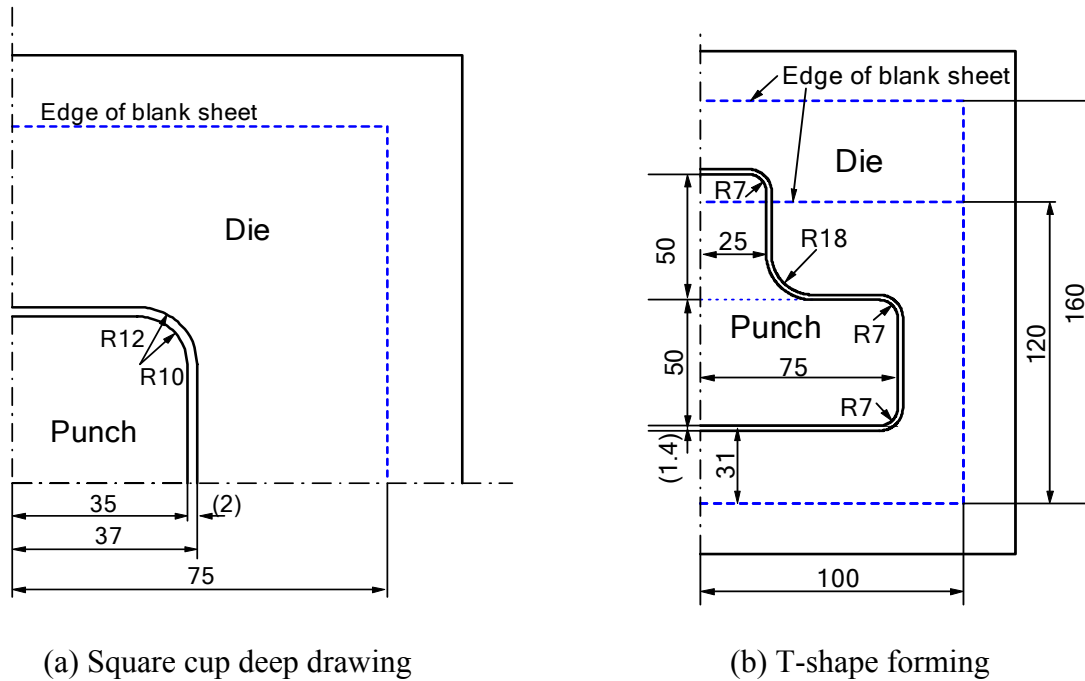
Dimensions of tools for square cup deep drawing and T-shape forming.
